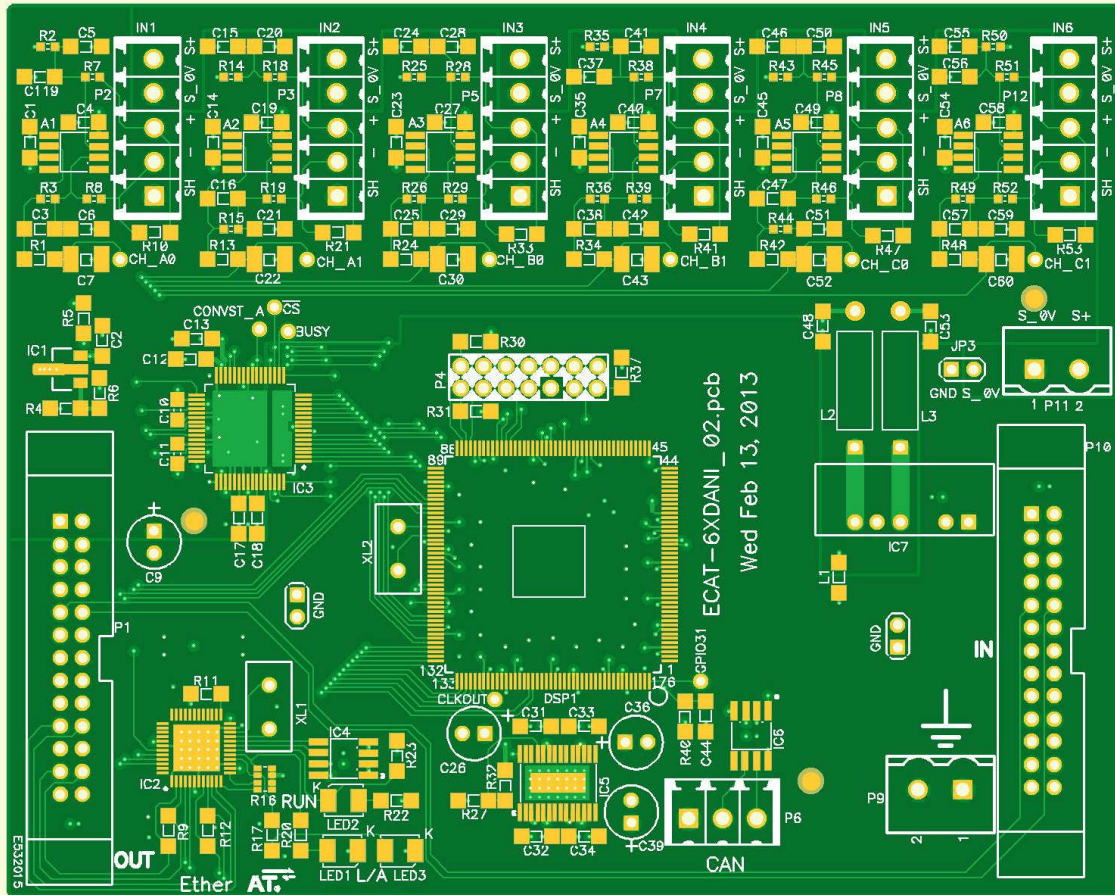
Unassembled PCB ECAT-6XDANI\_02 (DANI)
